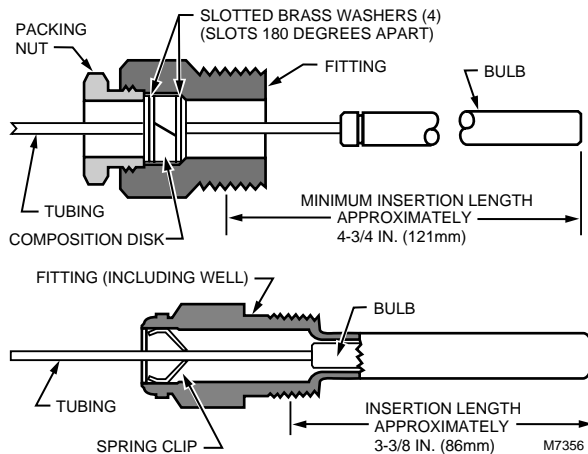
Use of bulb holder for mounting sensing element in air duct application. Dimensions in in. (mm).
